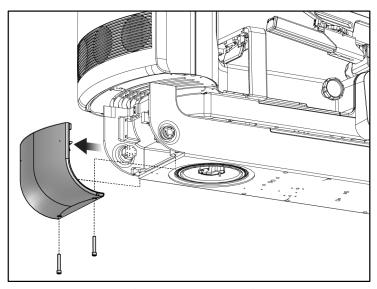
Removal of Detector-end cover of Tube Arm Mechanism
